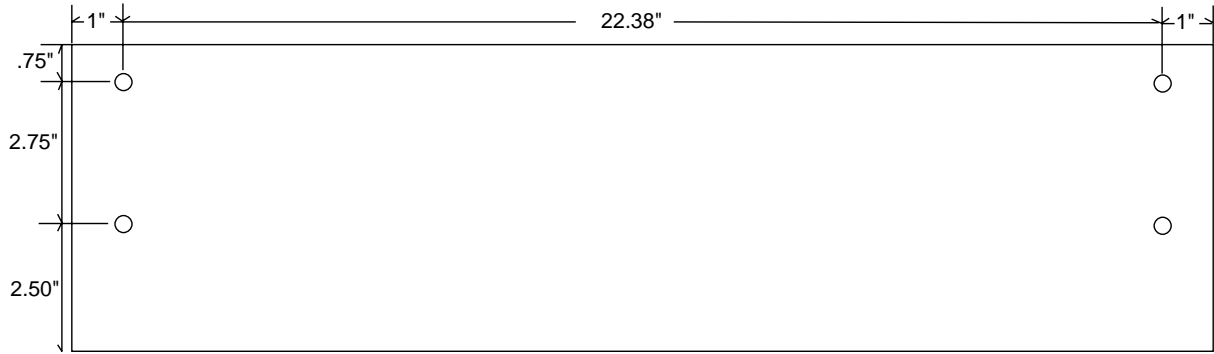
Mounting Dimensions - Flowmeter/Operator's Panel - 3 Torch
